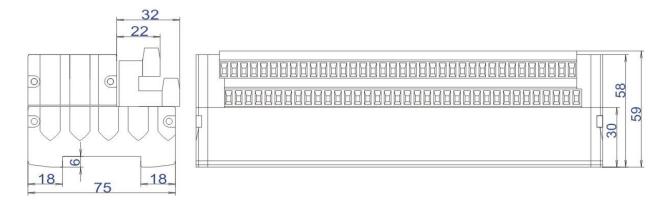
Dimensioning for assembling (dimension in milimiters)
